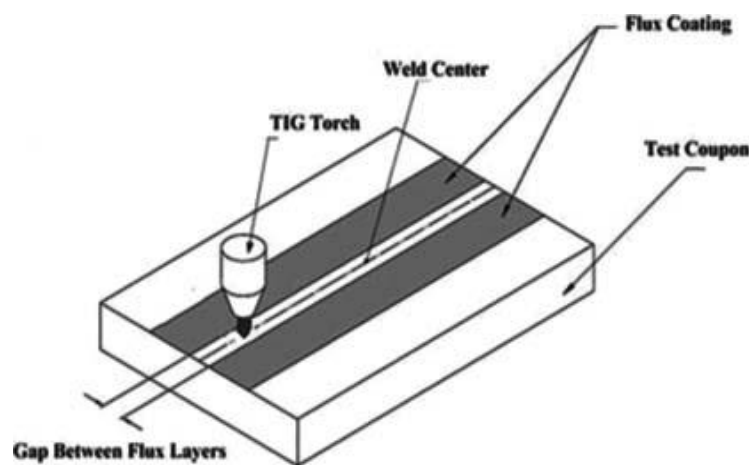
A schematic diagram of flux bounded TIG welding⁸
